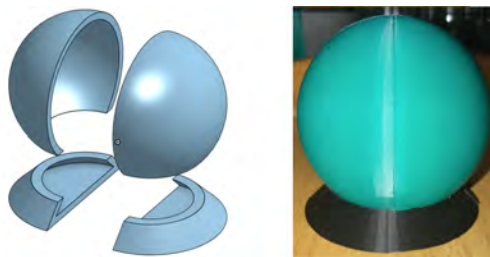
CAD design and 3-D print of the Snowglobe shell shape.
